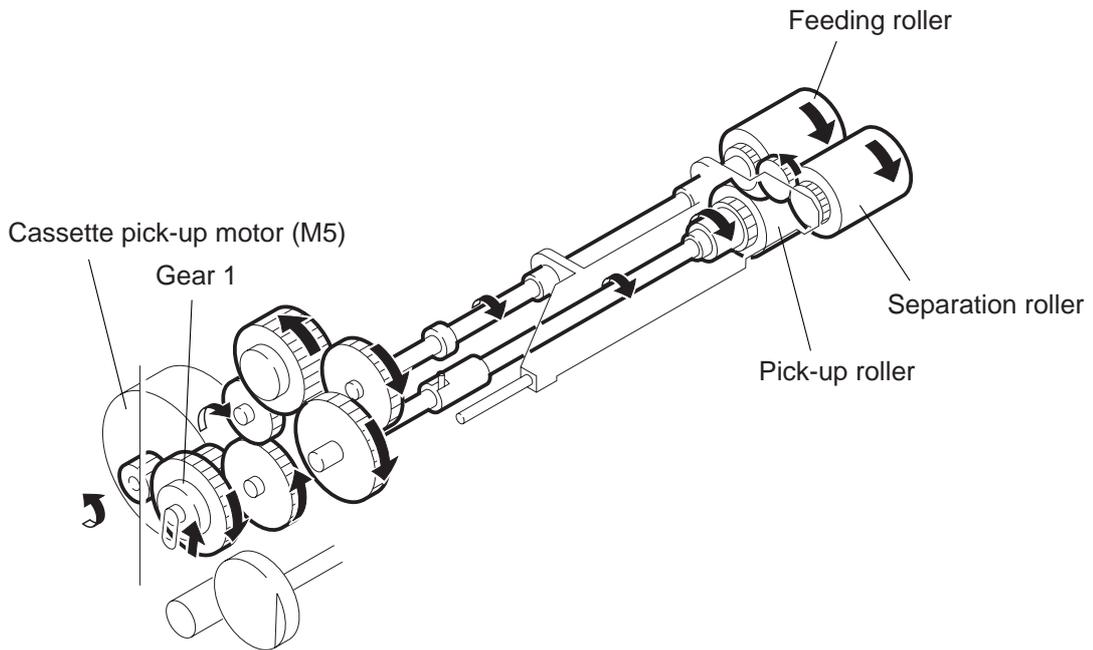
Upper Cassette Pick-Up Movement (pick-up motor rotating clockwise)
